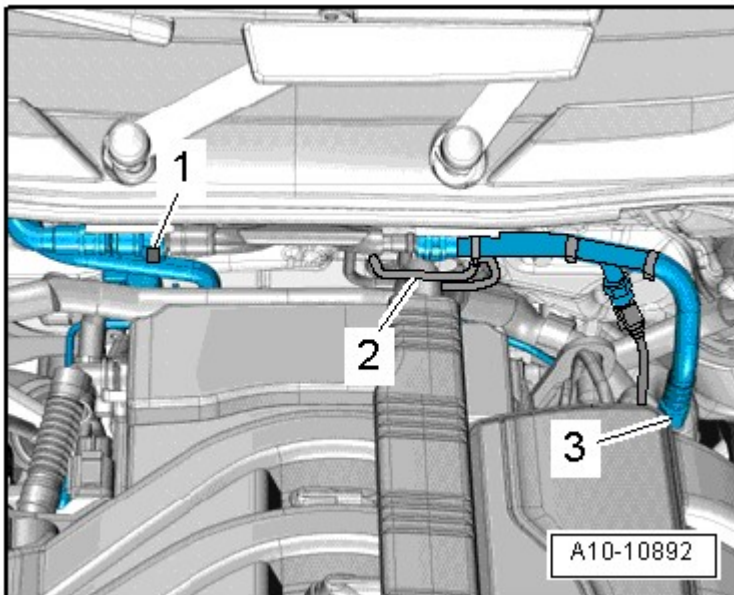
Identifying Vacuum Hose -1- To Evaporative Emission (EVAP) Canister Purge Regulator Valve -N80-
